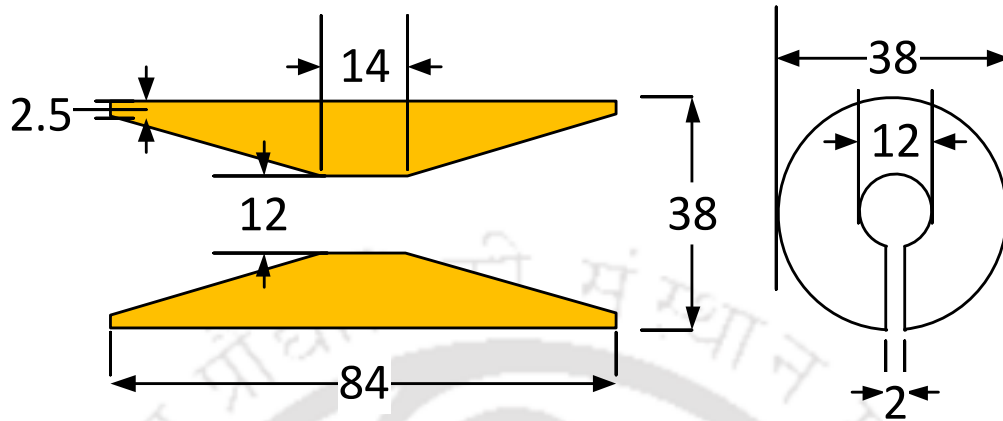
Dimensions of the field shaper (all dimensions are in mm)
